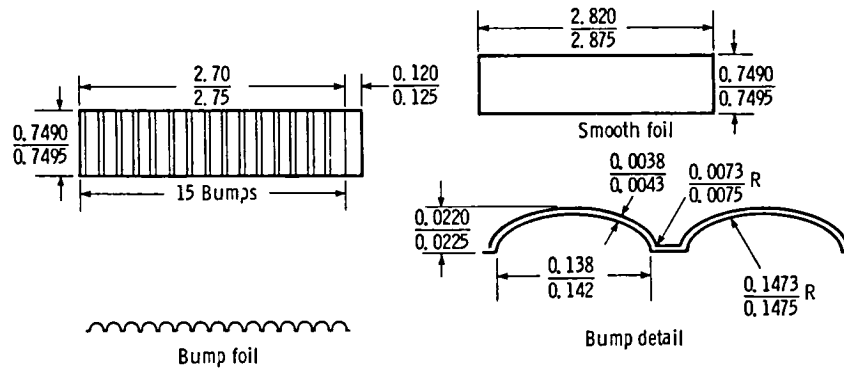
Details of compliant foil gas bearing. Material, Inconel x-750. Dimensions are in inches.
